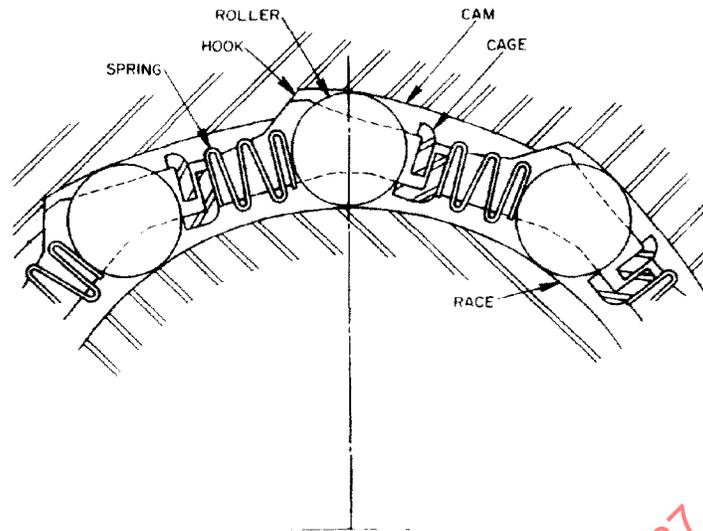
CAGED ROLLER OUTER CAM TYPE CLUTCH DIAGRAM (HOOK TYPE CAM)
